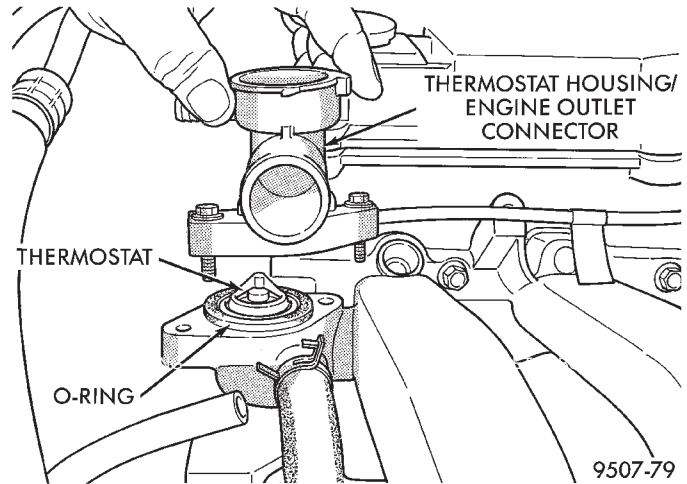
Thermostat and Engine Outlet Connector—2.4L Engine
